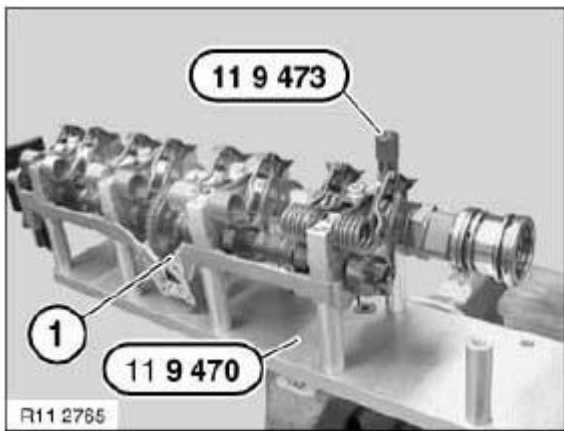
Identifying Special Tools (11 9 473) And (11 9 470)
